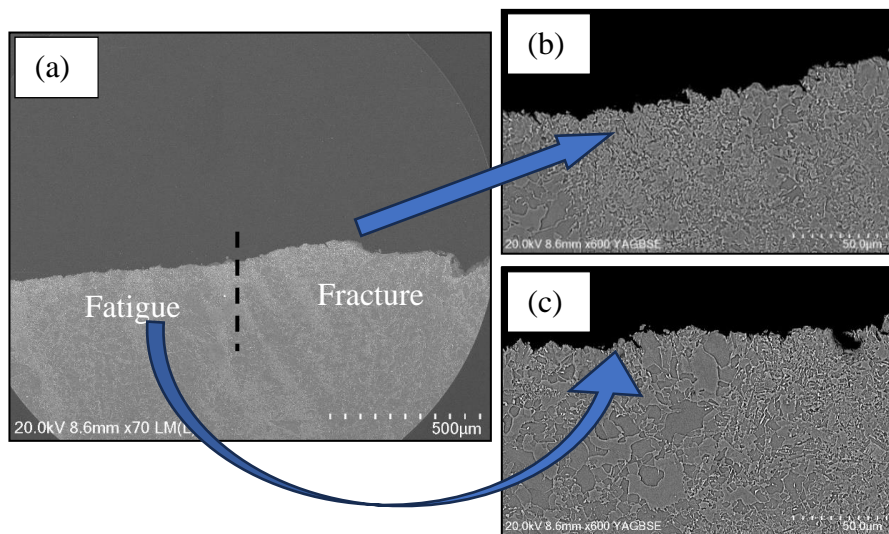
SEM image shows (a) the complete crack path, (b) back scattered electron image of the crack path in fracture and (c) the crack path in fatigue of specimen FT-8.
